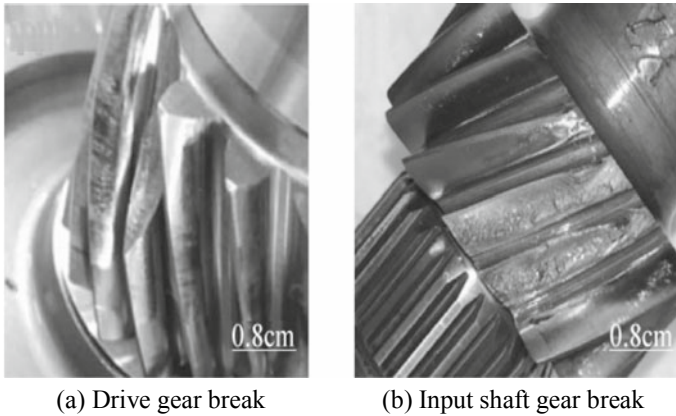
Example of automobile gear bending fatigue failure
